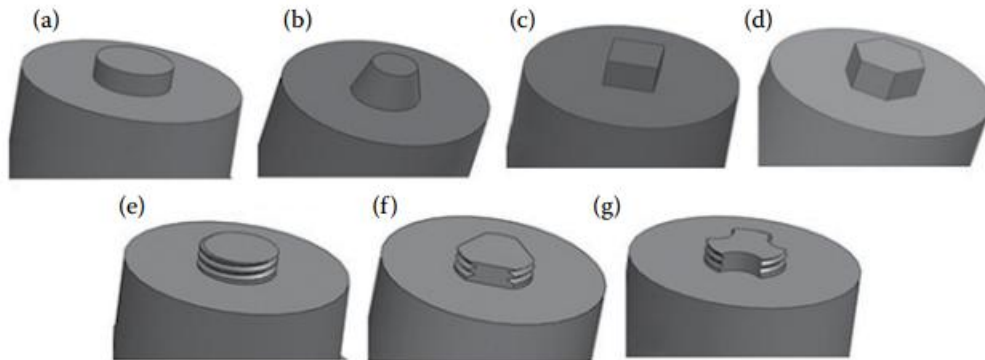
Different FSW tool pin profiles: (a) cylindrical, (b) tapered cylindrical (i.e., frustum of a cone), (c) square, (d) hexagon, (e) threaded cylindrical, (f) threaded cam, and (g) threaded tri flute [13].
